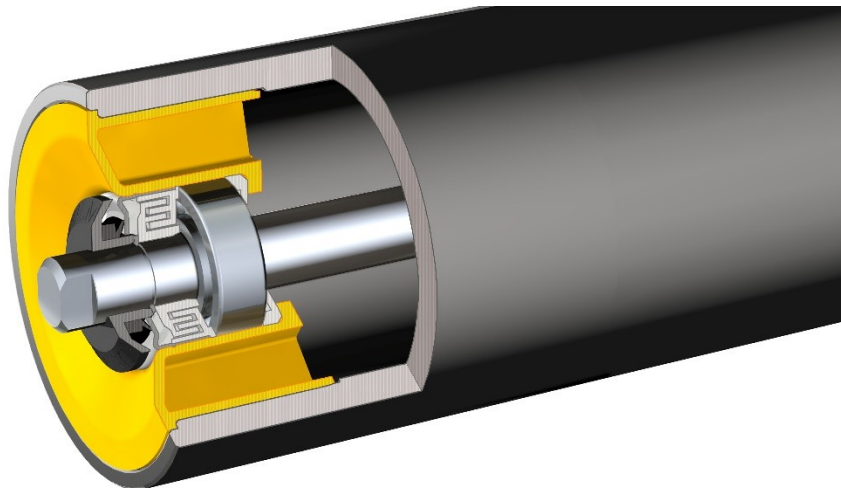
Cut away of a roller end (Rulmeca, 2013)
